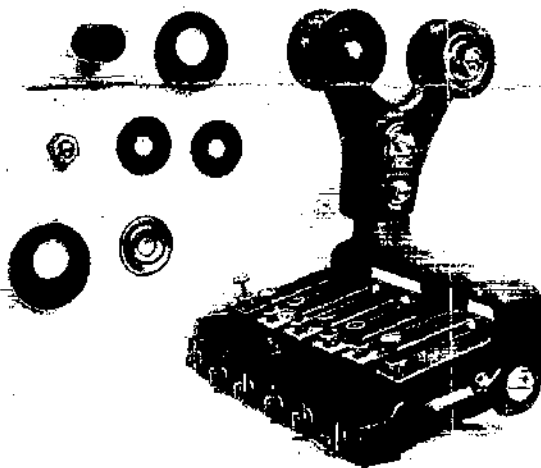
Brush Holder Arm with Eccentric Bushing Parts
